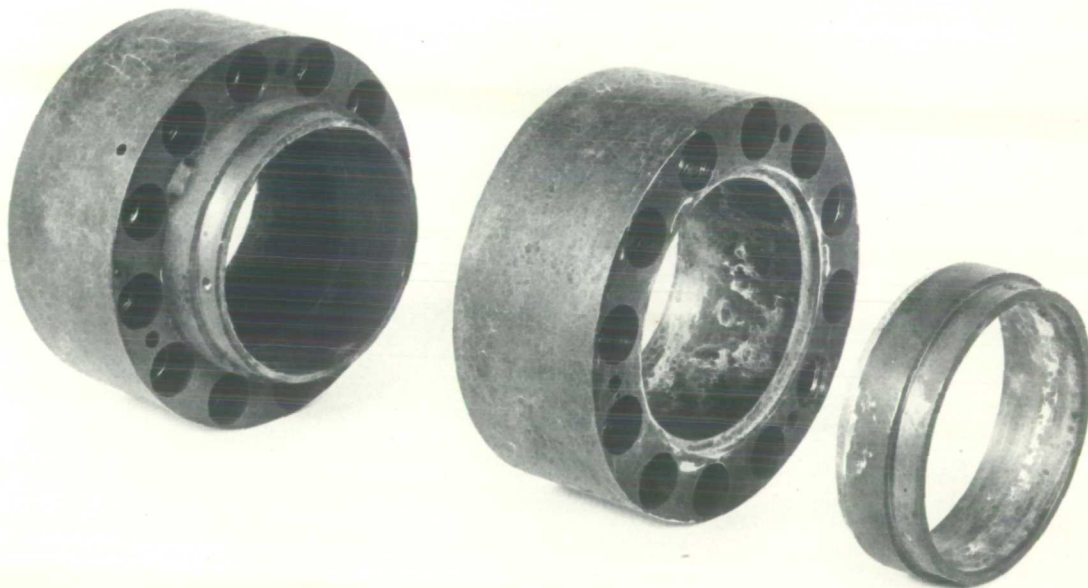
EXPLODED AND ISOMETRIC VIEW OF MILD STEEL TOP RING
